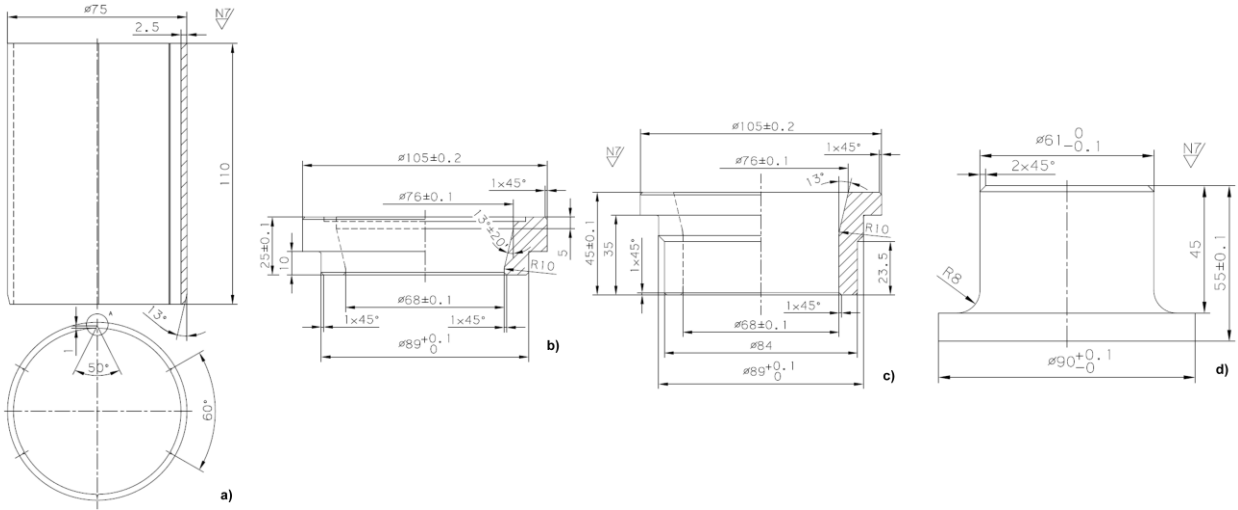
Dimensions of samples: a) Seamless grooved tube, b) Splitting tool, c) Smaller cone angle bushing and d) Larger cone angle bushing
